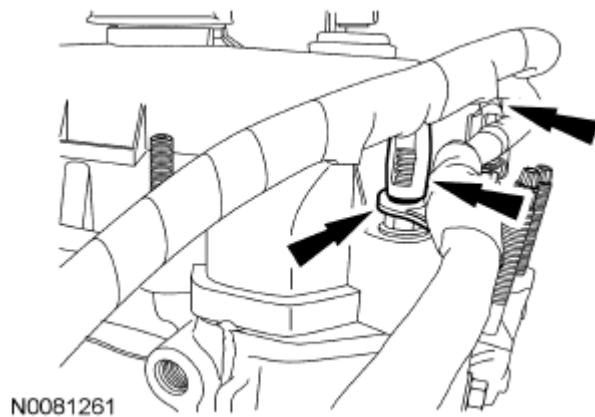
Locating Wiring Harness Retainers And RH Side Valve Cover Stud Bolts
